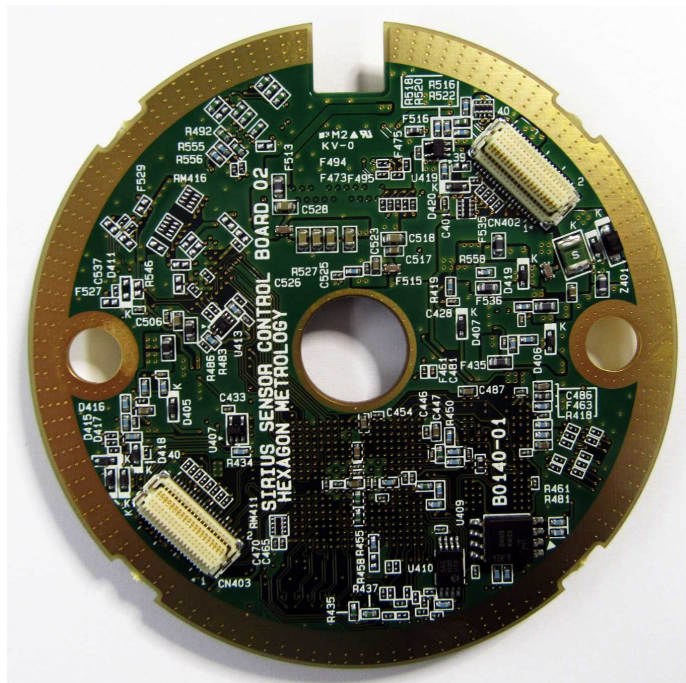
DS-SENSOR-B0140-01_PCB_Photo_SolderSIDE
